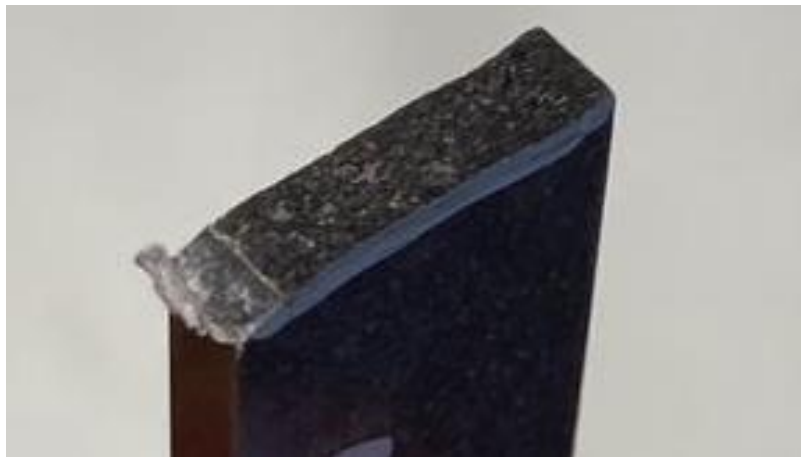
Injection Molded MSC-40C Tested Izod Specimen Fracture Surface
